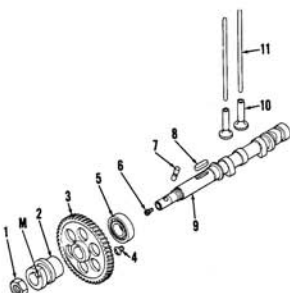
Exploded view of valve and fuel injection pump camshafts. Install injection pump camshaft so "O" mark (M) is facing out.
